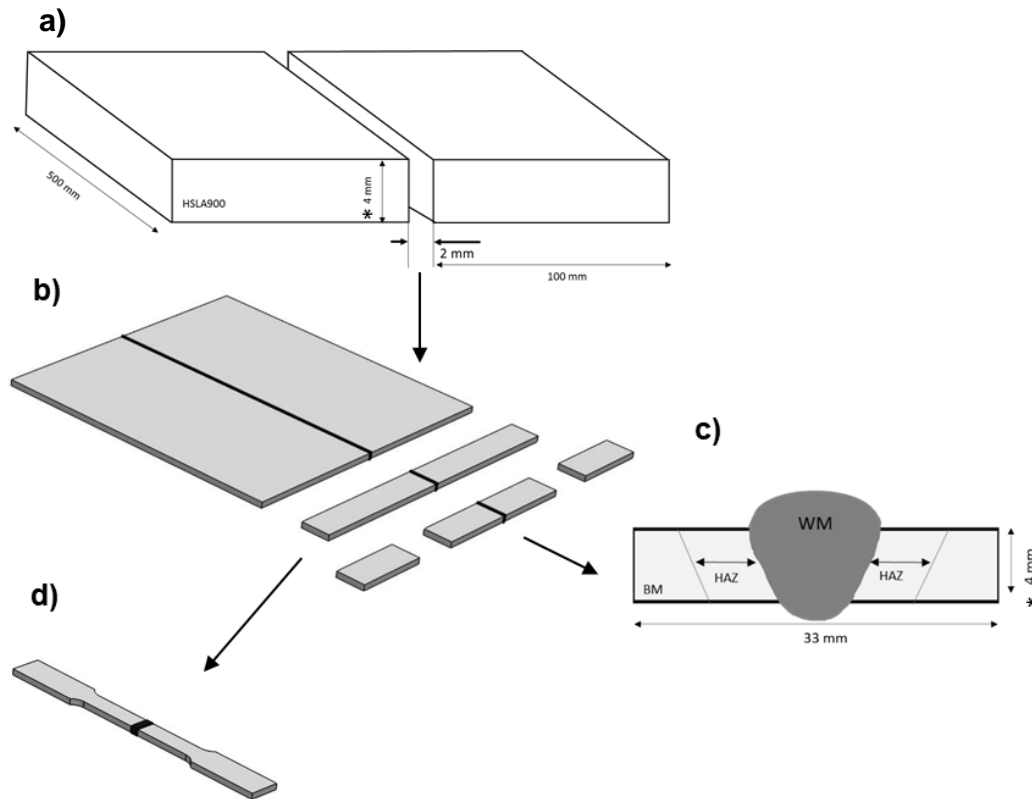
Illustration of specimen preparation: a) Base metal before welding; b) Bulk specimen after welding and its cutting; c) butt weld specimen for optical metallography, microhardness and corrosion tests; d) tensile specimen. *In the case of LNE500 the thickness is 6mm.
